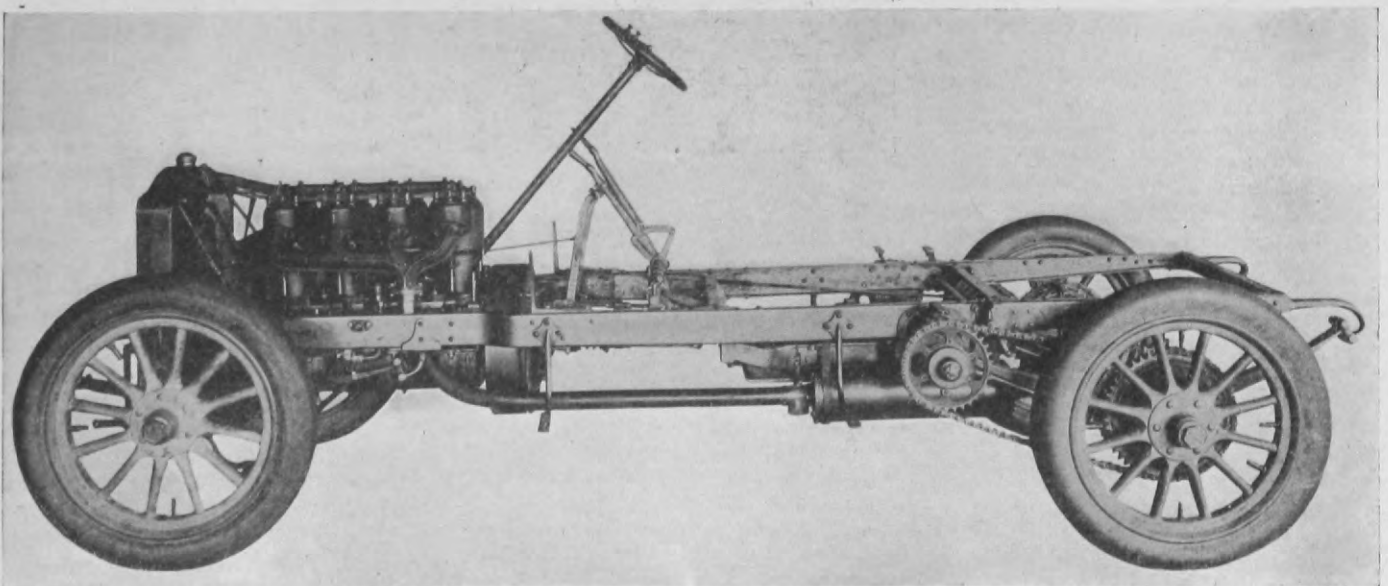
SIDE VIEW OF THOMAS CHASSIS COMPLETE.
